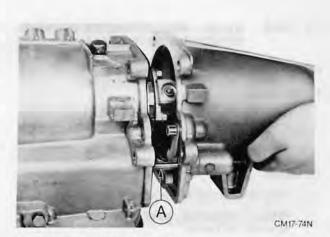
Fit extension housing A – Parking pawl actuating rod
